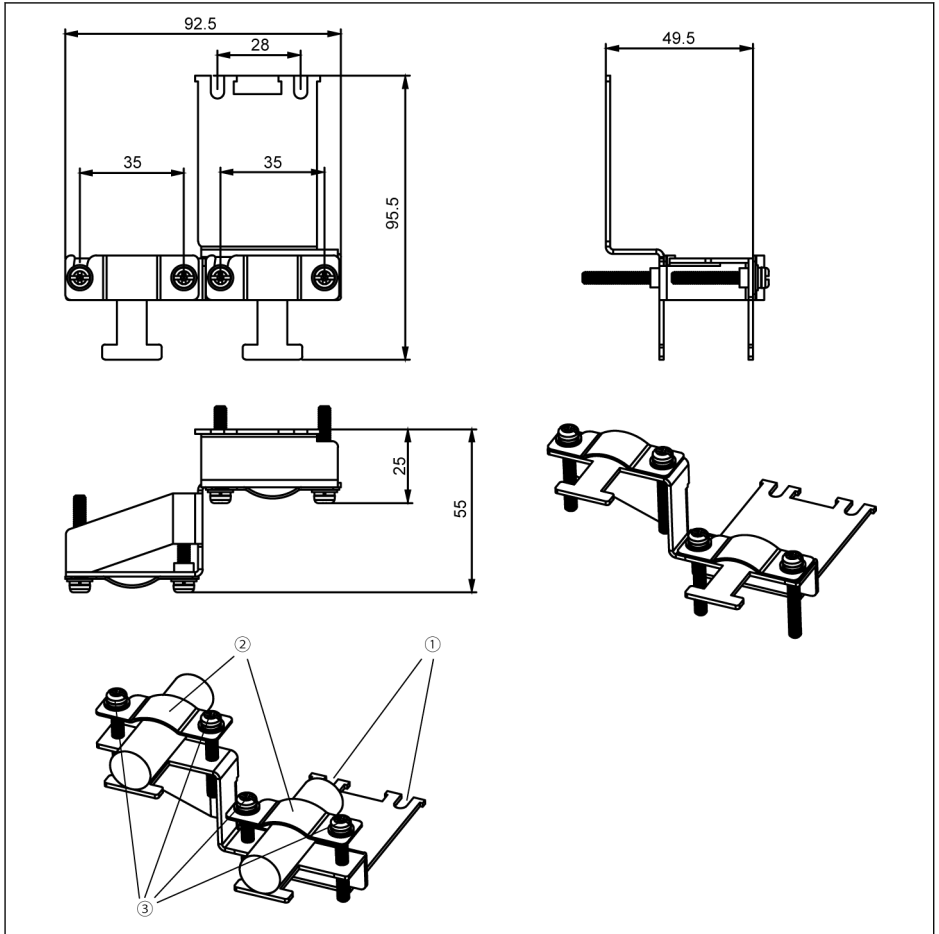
Shielded cable connection with accessories for E, F, G housing (FEAM03.2-002-NN-NNNN)
